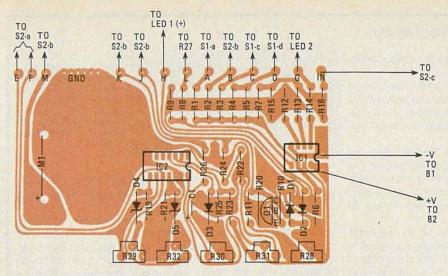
MOUNT TRIMMER POTS R28-R32 so they can be adjusted from outside of board.
